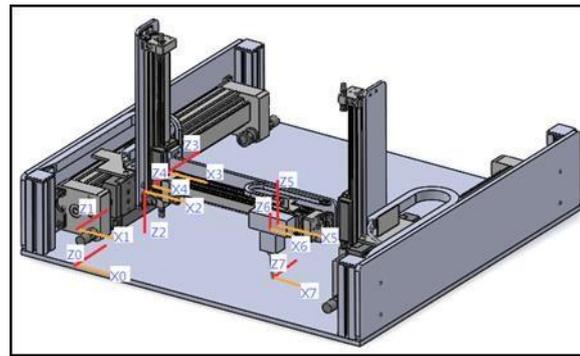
The structure of D-H notation of the three dimensional pneumatic sewing machine platform.
